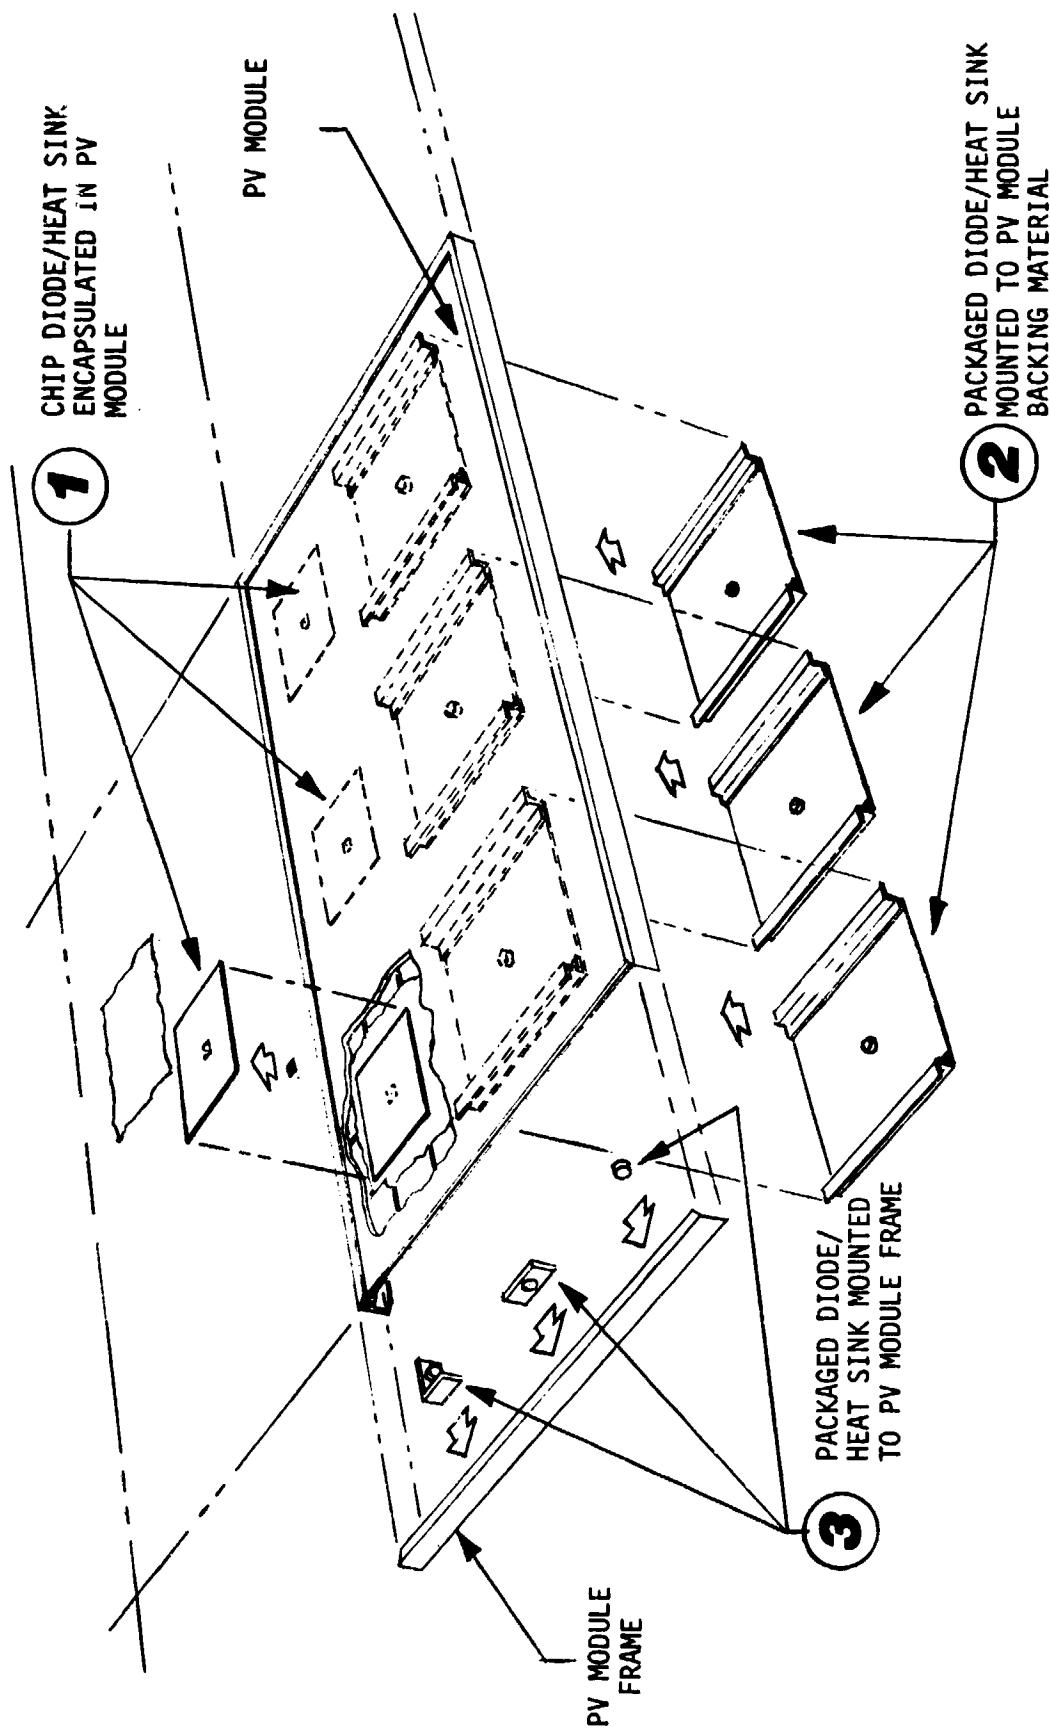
Concepts of Diode/Heat Sink Mounting to PV Module Assembly
